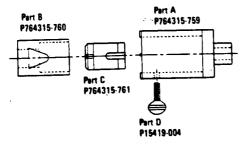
BEARING PRE-LOADING TOOL (P-764325-730).
